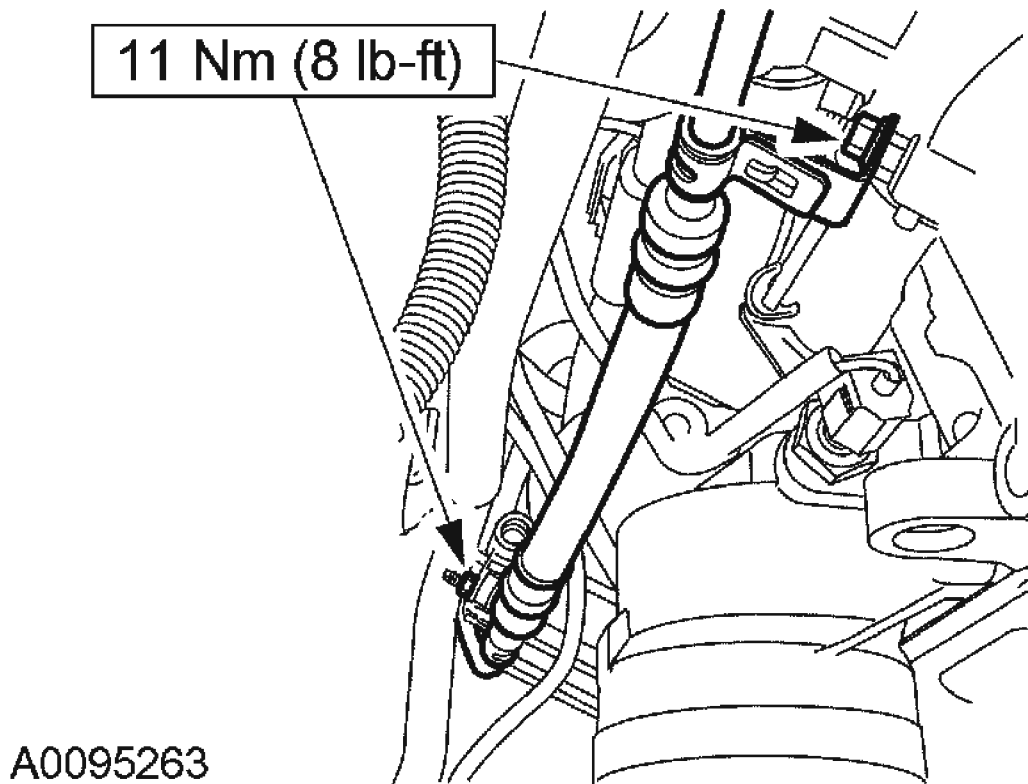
Removing Power Steering Pressure Line Bracket Nuts
